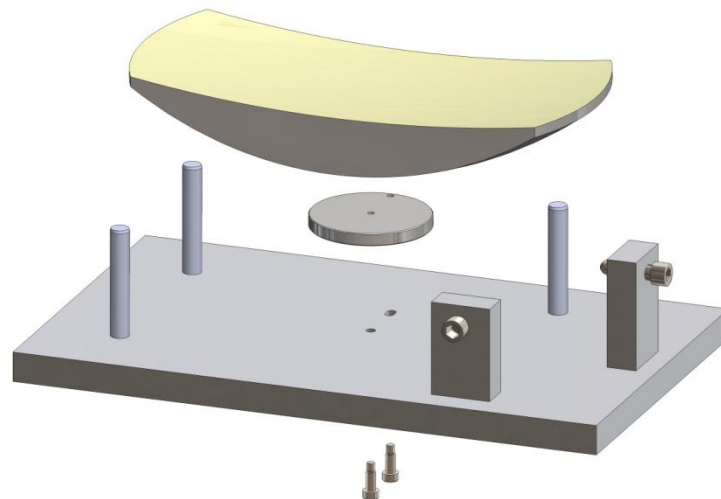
Exploded view of the collimator mirror and puck alignment fixture.
